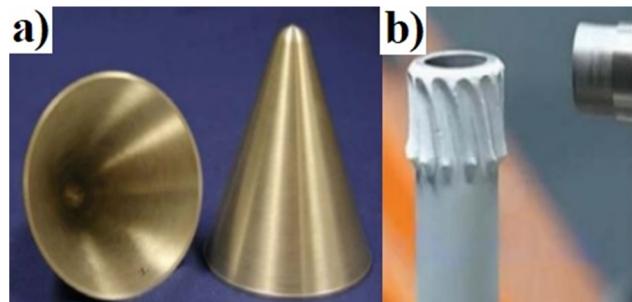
CSAM parts of intricate structures: (a) cone and (b) gear [51].
